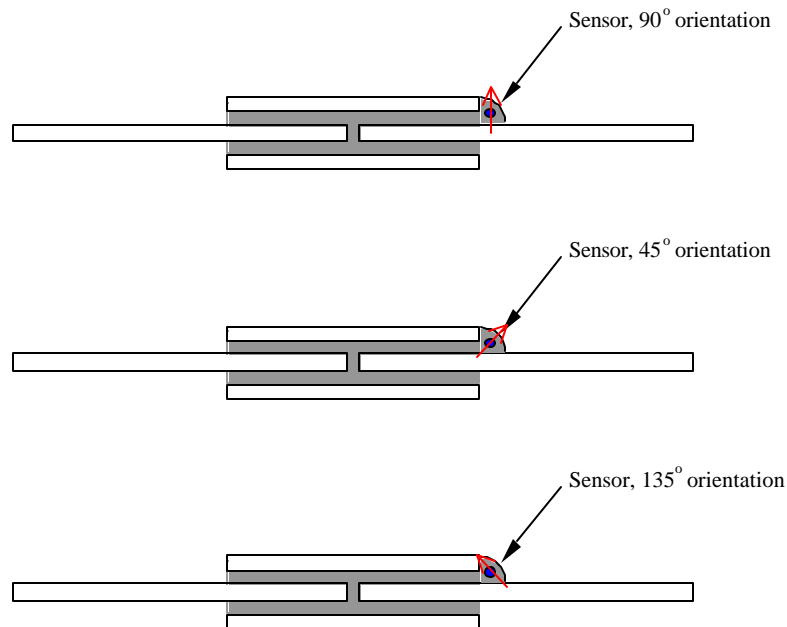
Retrofit of multiaxis sensor to existing adhesive joint
